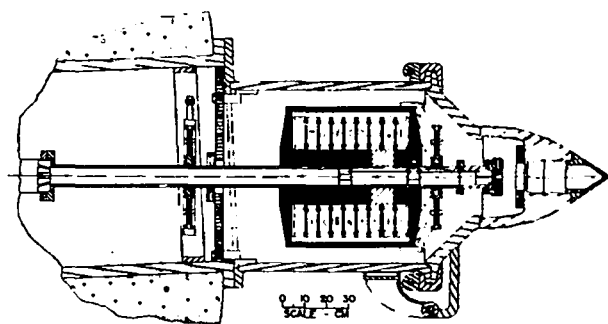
Blast protective system housing focusing lens and target assembly.
